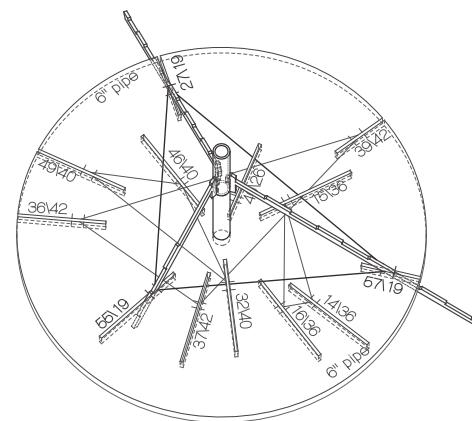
Steel assembly process: precise horizontal angles registered by angle-finder welding jig. Radially-cut steel pipe, flat-cut steel struts, and plywood angle-finder jig.
